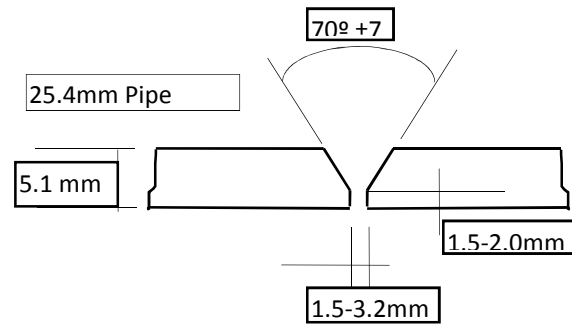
Actual Joint Design for the welding of P91 Pipe
